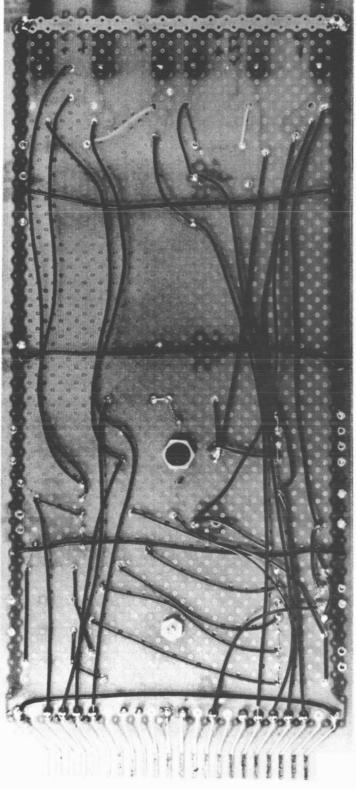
Bottom View Board 7 High Voltage Power Supply
